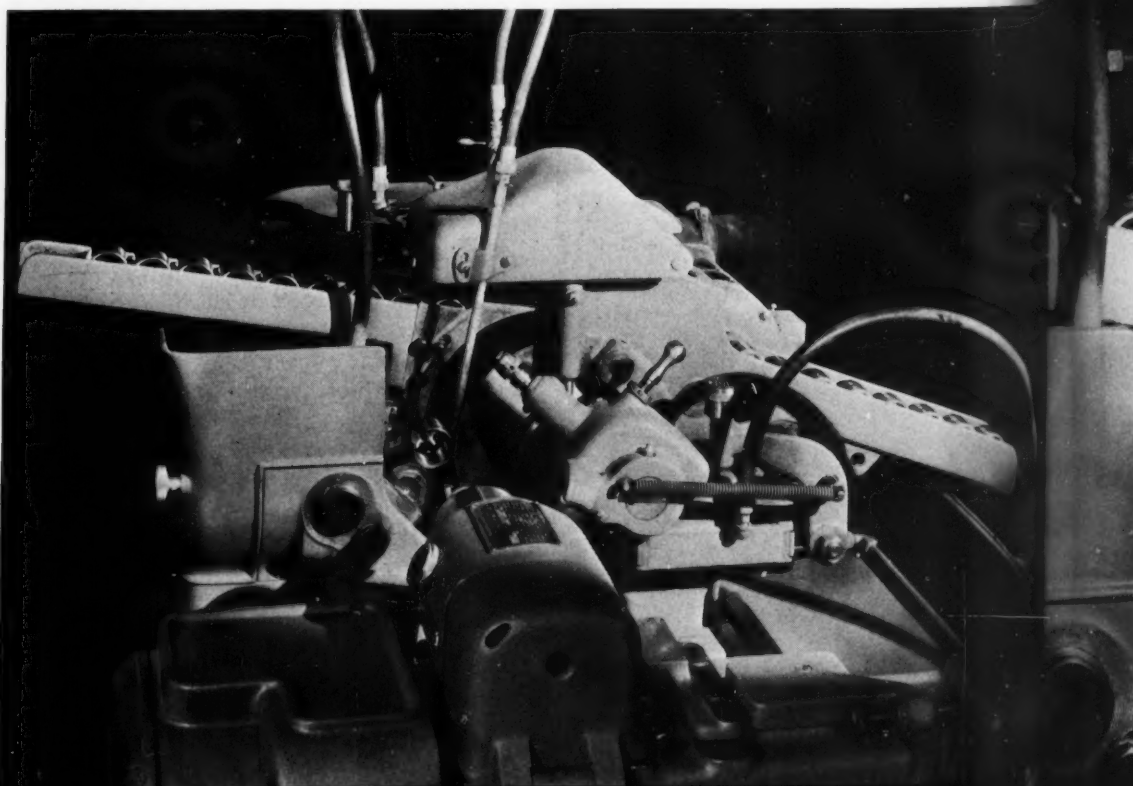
Above — Workpiece follows loading arm into grinding position
